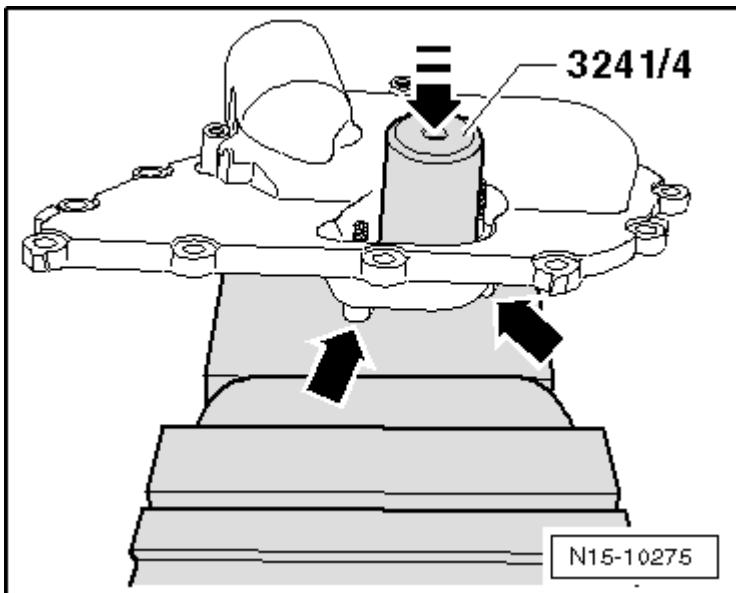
Identifying Special Tools - Crankshaft Needle Bearings, Pulling Out And Driving In
